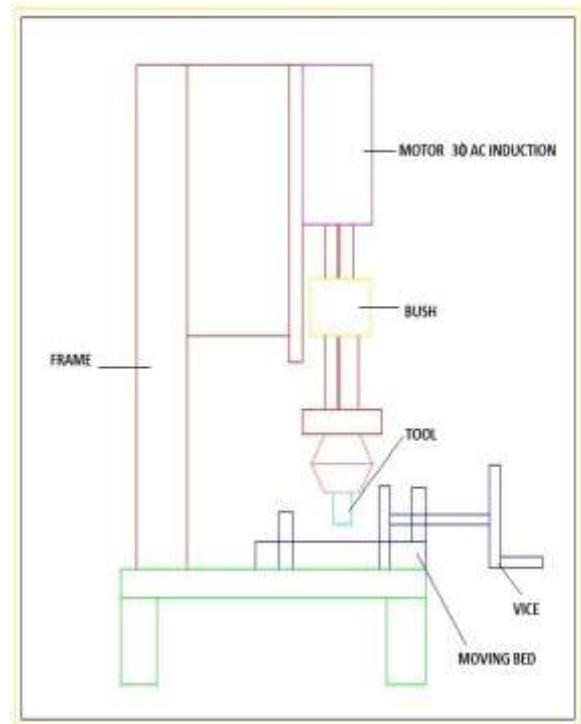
2D View of Friction Welding machine (AUTOCAD)
